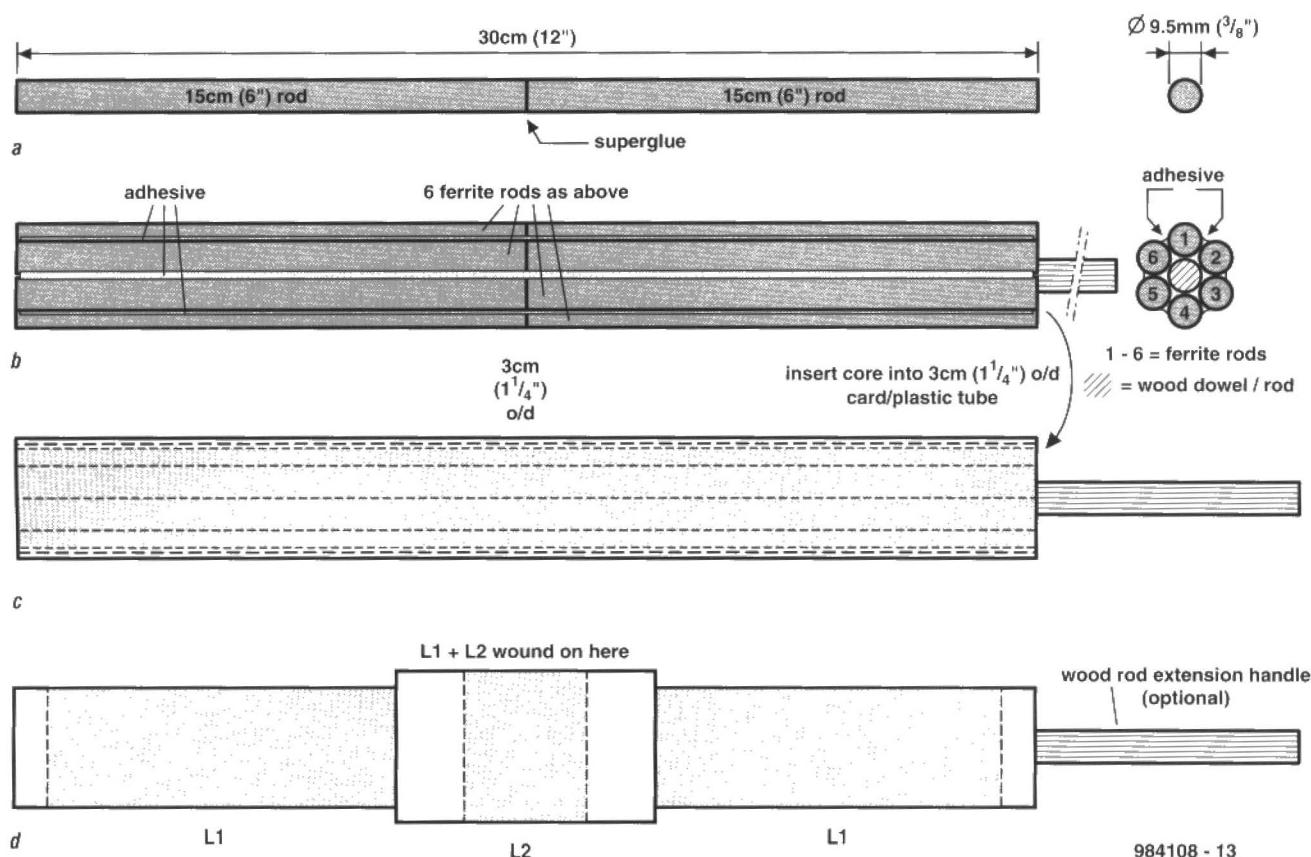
Build the Ultima in this order. Forming a single 30 x 1 cm (a); and a single 30 x 3.2 cm ferrite core (b). Drawing (c) shows the 30 x 3.2 cm ferrite winding assembly, and drawing (d) the format of the final ferrite core.
